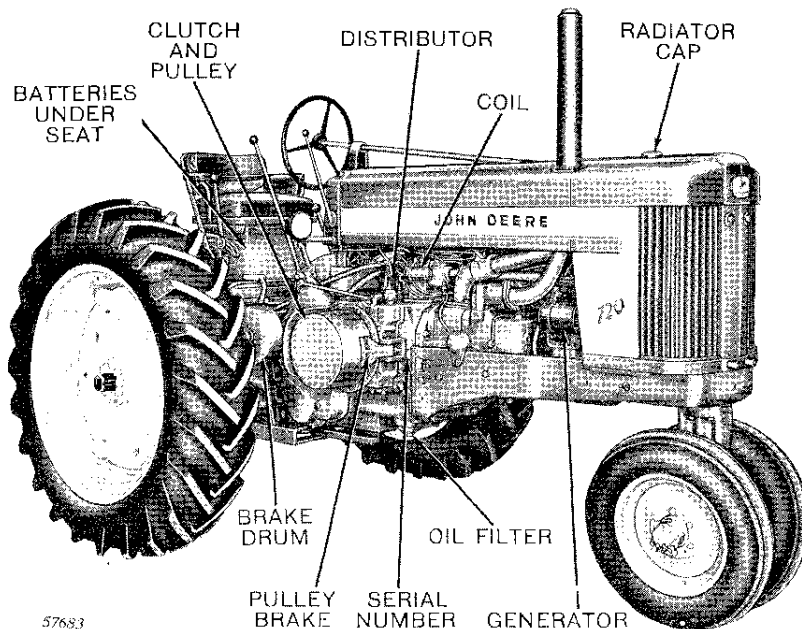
John Deere "720" Series General-Purpose Tractor—Pulley Side
